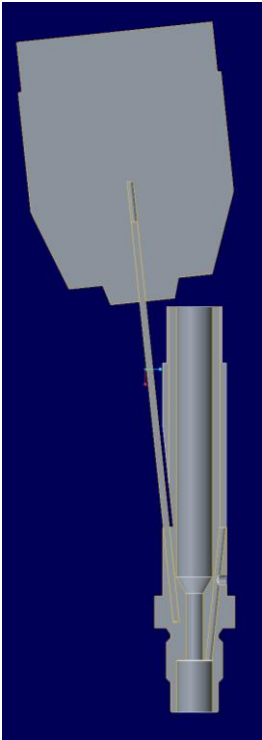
3D simulation of how to manufacture the thermocouples holes
